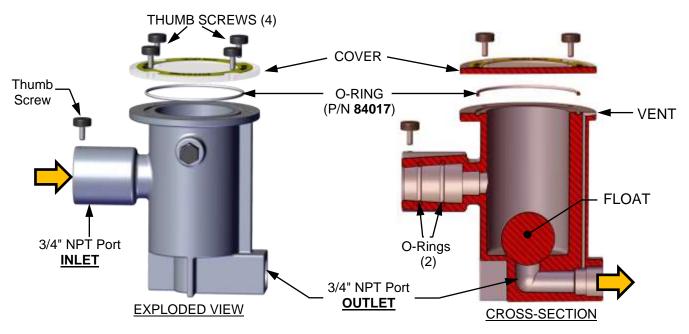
External Condensate Trap – Cross-Section & Exploded View
